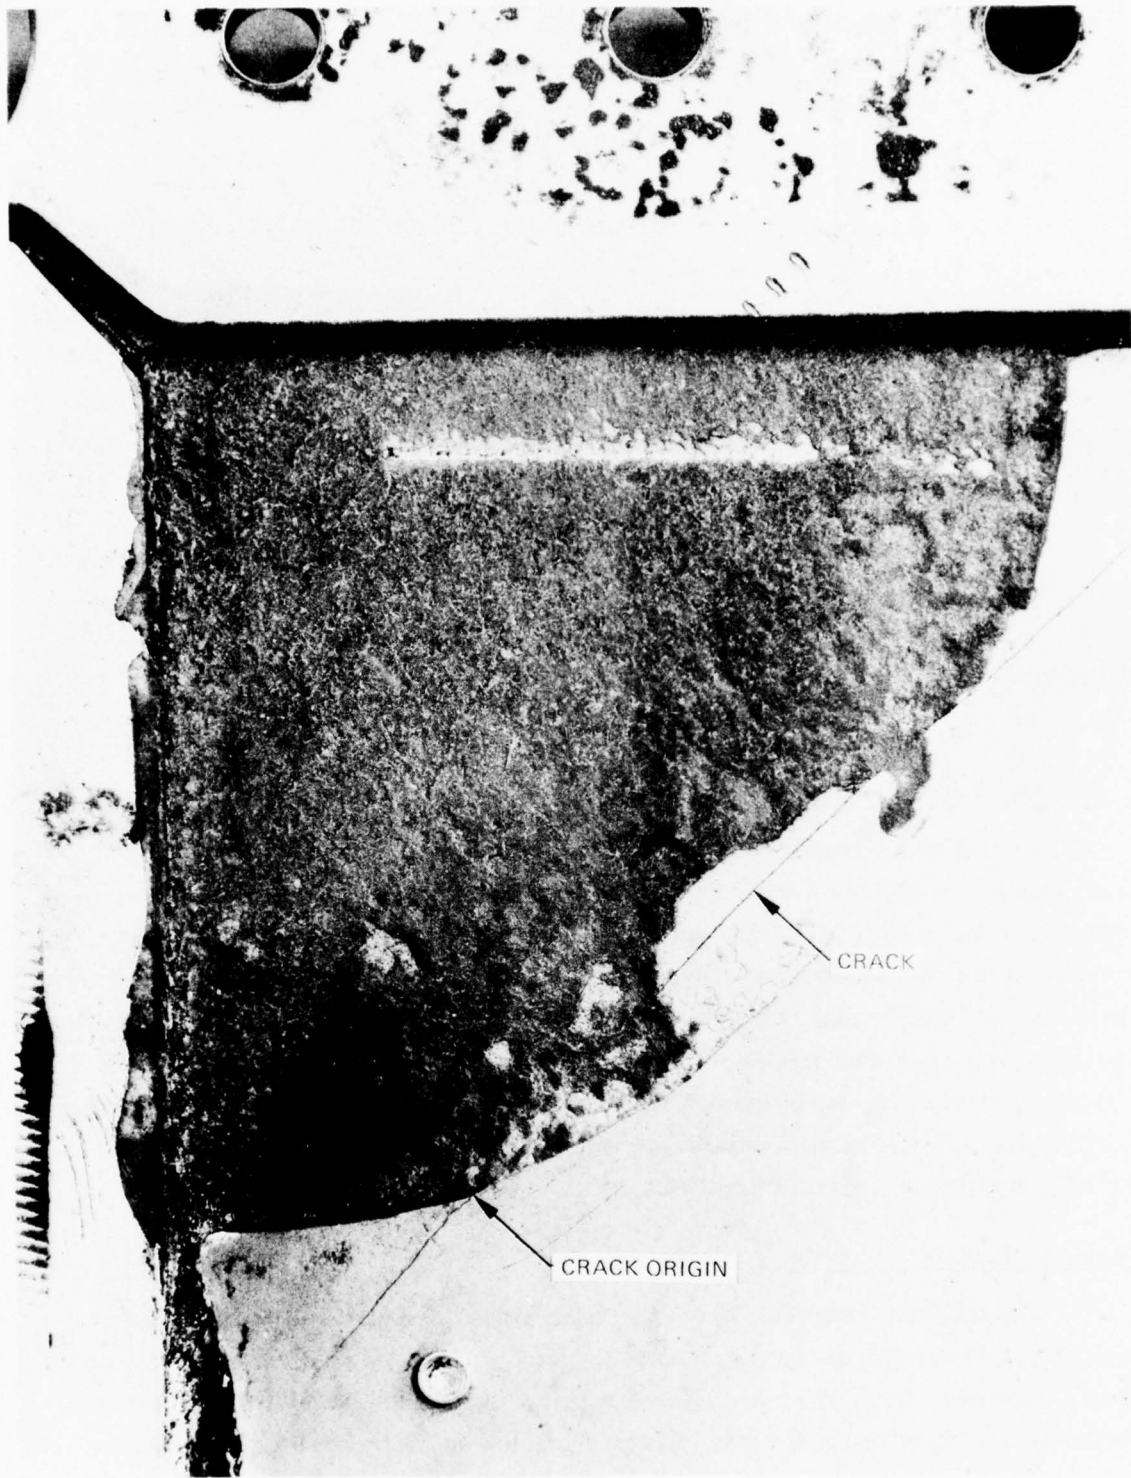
ADHESIVE BONDED PANEL SKIN FATIGUE CRACK LOADED CORNER
